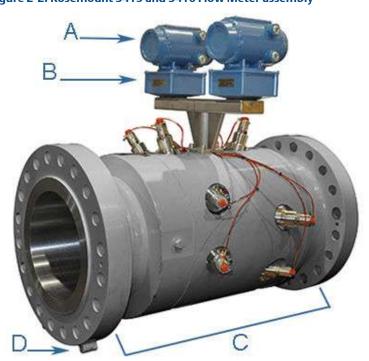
Rosemount 3415 and 3416 Flow Meter assembly⁽²⁾
